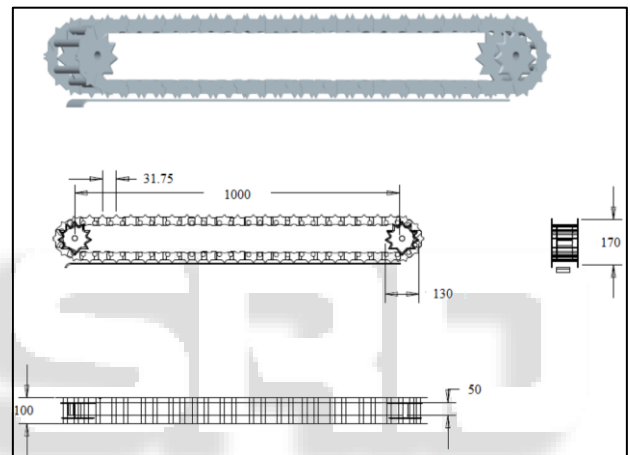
Front, Top, Side & Schematic View of Pulley & Belt Conveyor of Developed Thresher
